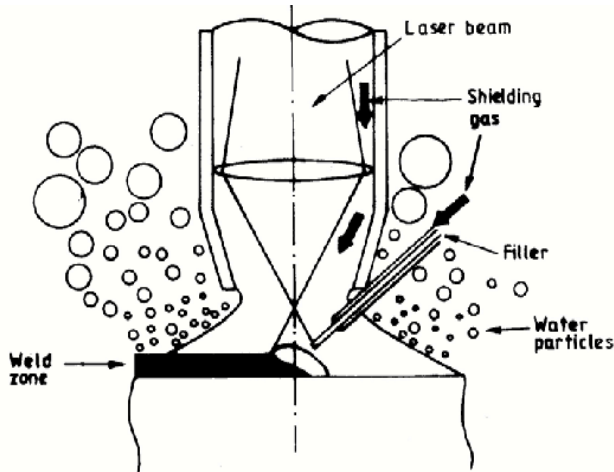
Schematic of laser welding with a filler rod.
